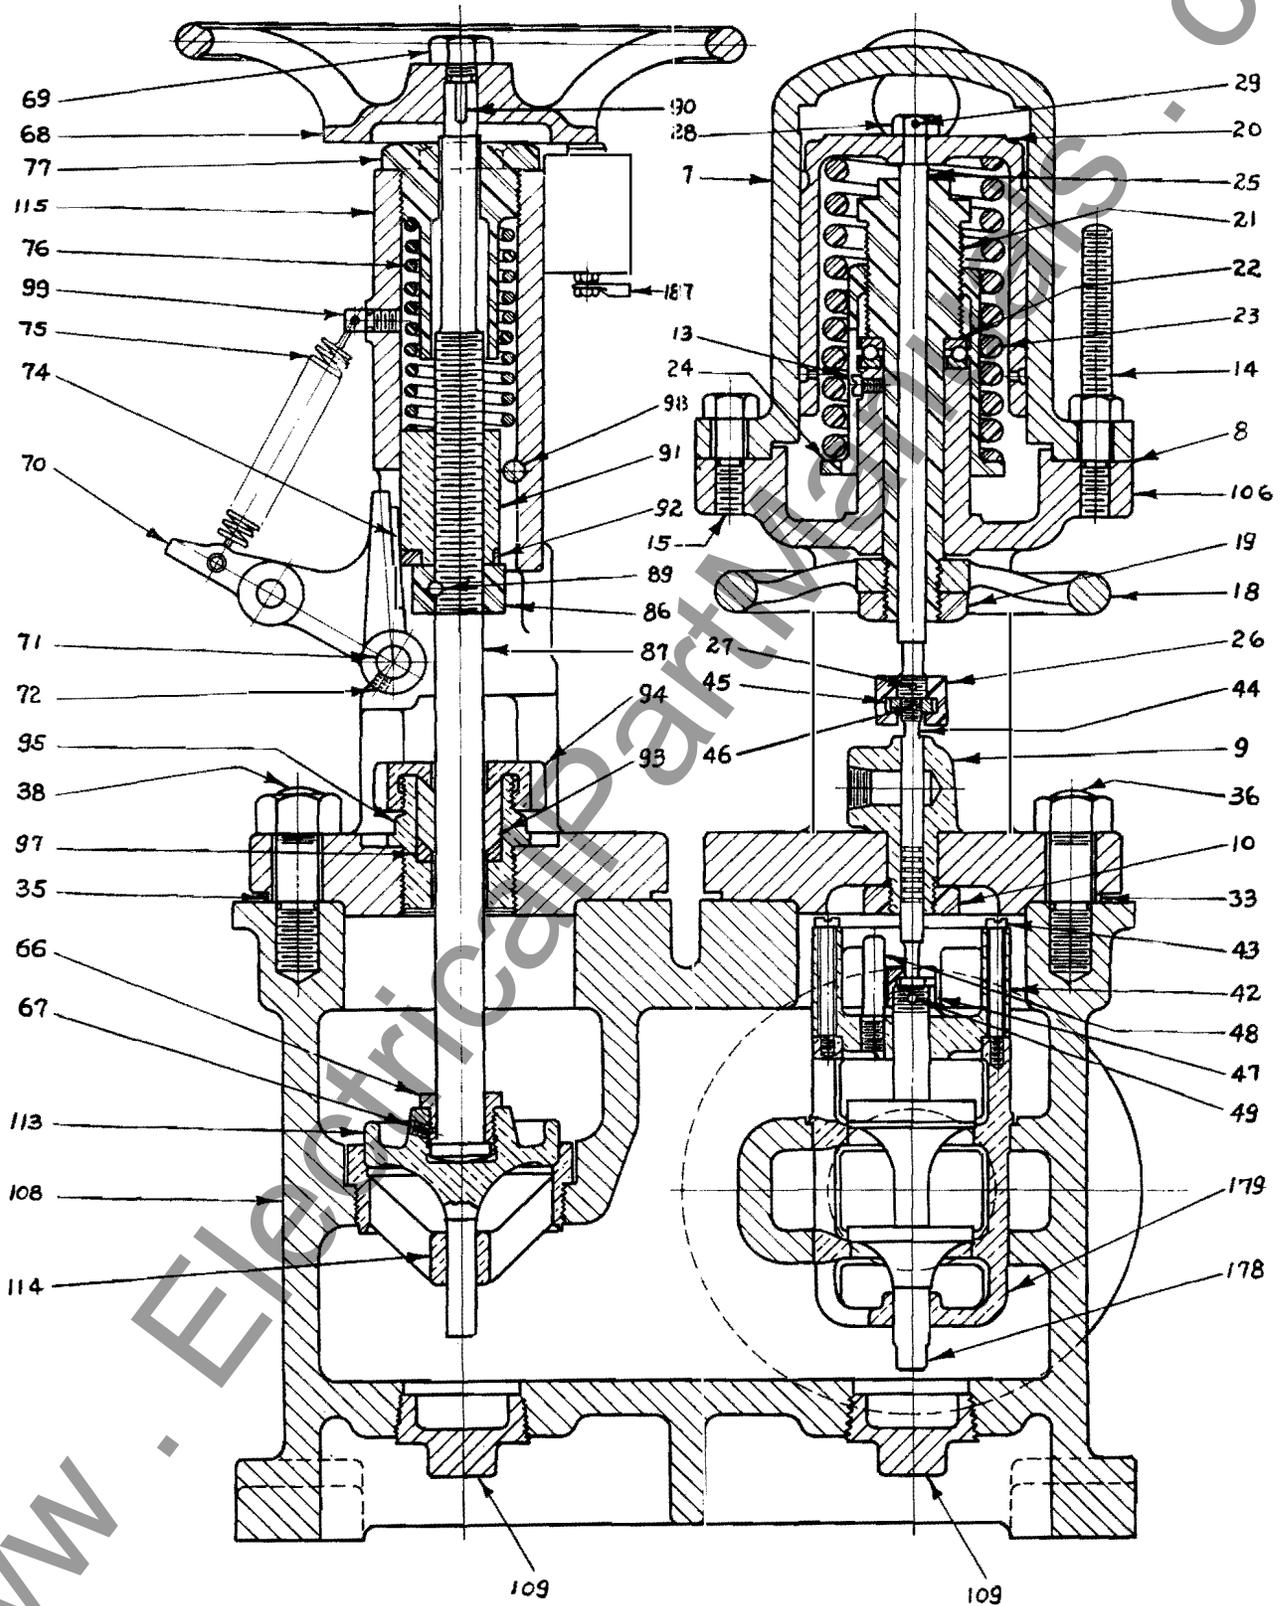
GOVERNOR, STEAM CHEST AND THROTTLE VALVE
